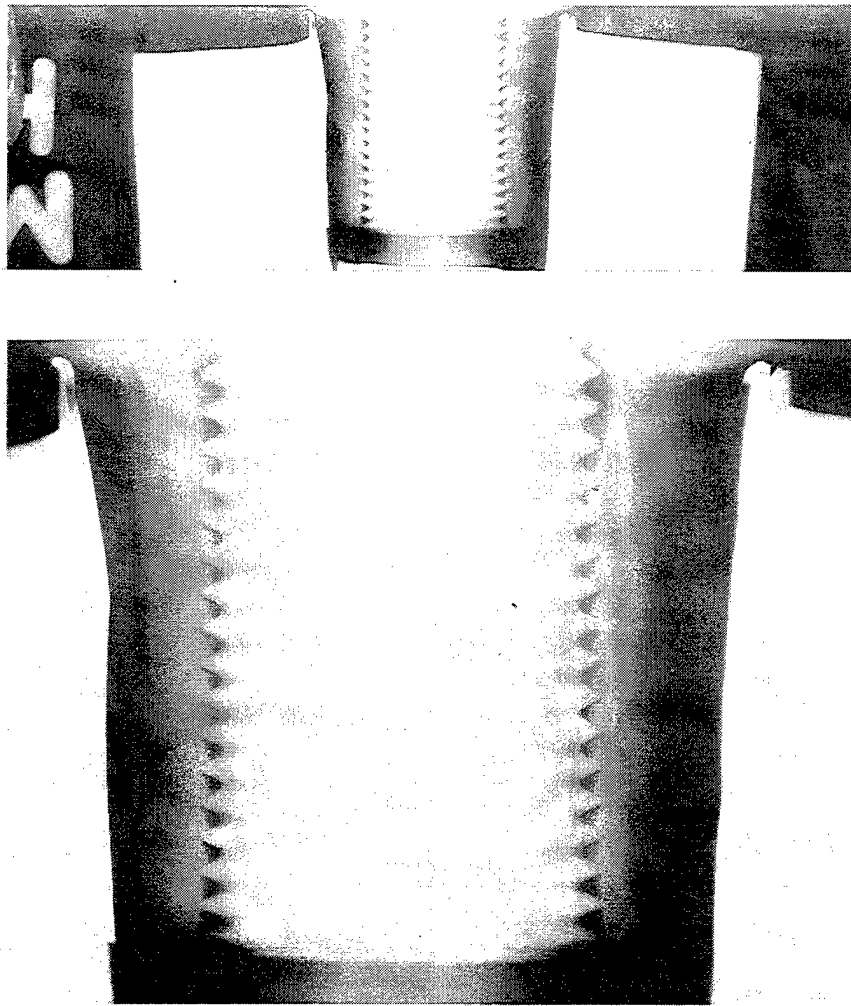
Photographs of a radiographic image of the collar fully swaged on the locking groove portion of the Huckbolt fastener pin. Shear test Specimen F. The push test was stopped at a 21,350-lb maximum load before the complete shearing of the collar interior wall. Note partial shearing of the wall in the image. Actual size (top). Magnification: $2\frac{2}{3}\times$.
